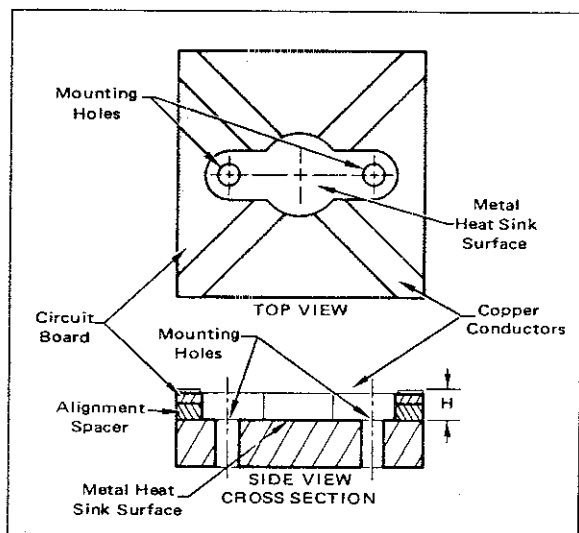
Flange Type SOE Transistor Mounting Method
